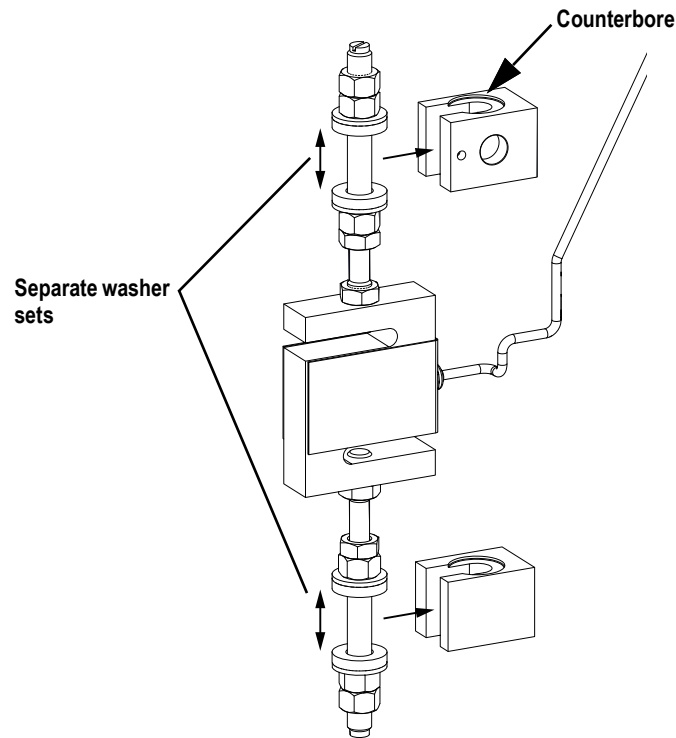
Fitting Load Cell Assembly into Blocks (Before)
